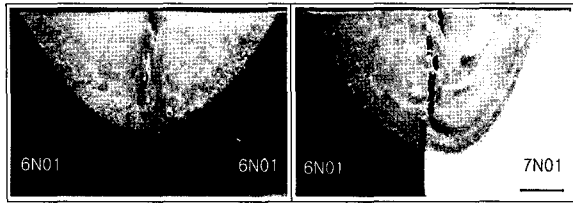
Cross-sectional macrostructures of Al alloy butt welds
